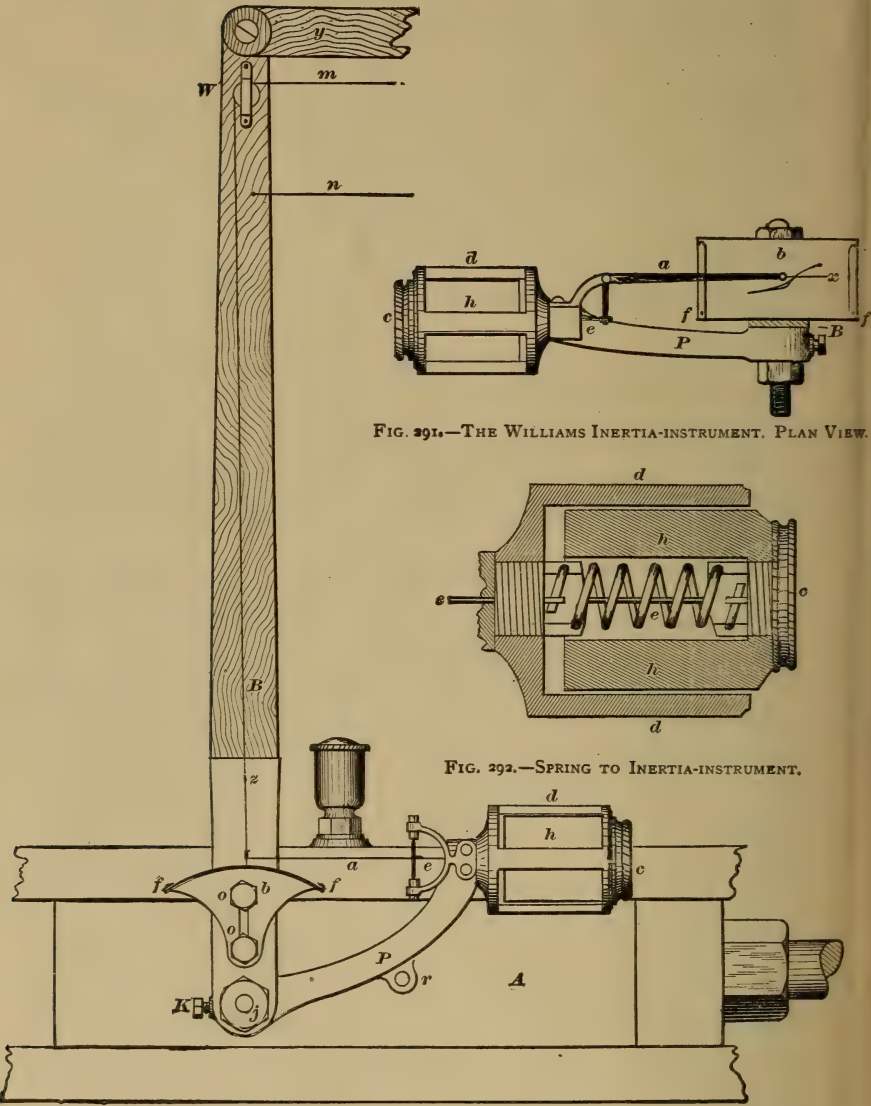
THE WILLIAMS INERTIA-INSTRUMENT. PLAN VIEW.
